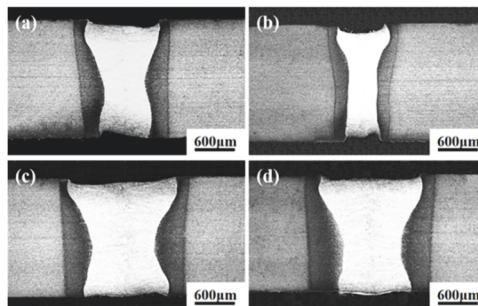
Cross-sectional morphology of the weld joint before press hardening: (a) 3 kW; (b) 4 kW; (c) 5 kW; (d) 6 kW.
